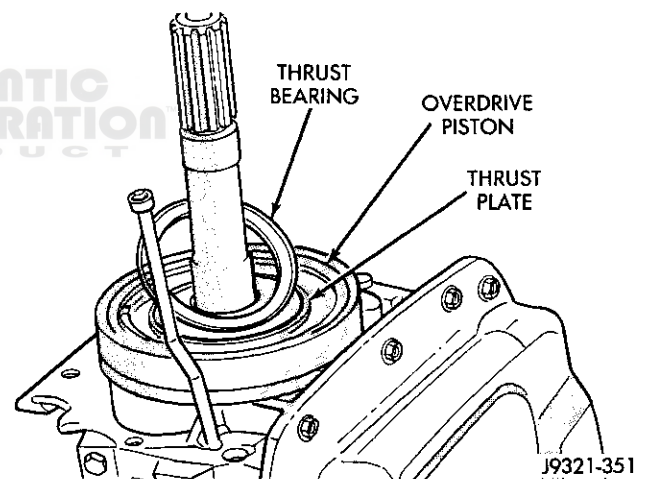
Overdrive Piston Thrust Bearing Removal/Installation
